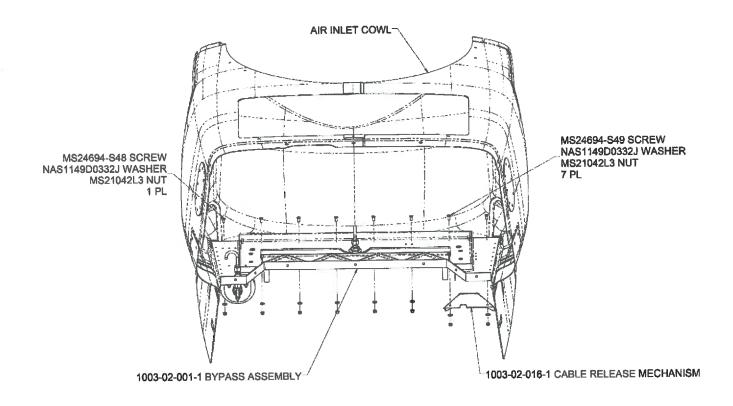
1003-02-001-1 Bypass Assembly Removal/Installation
